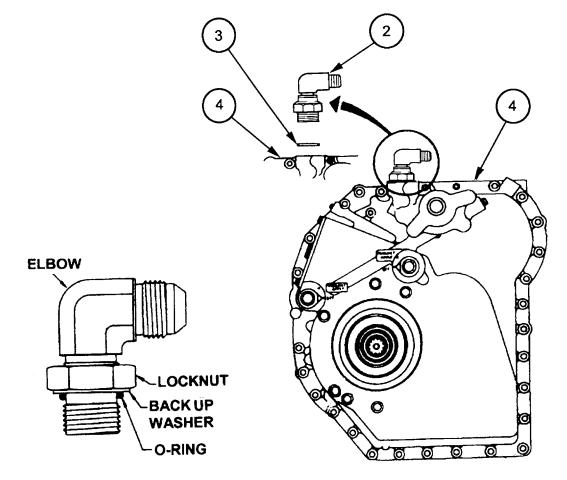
X200-4A Cooler Line Elbow. INSTALL COOLER LINE ELBOW AND RH OUTPUT FLANGE – Cont.
